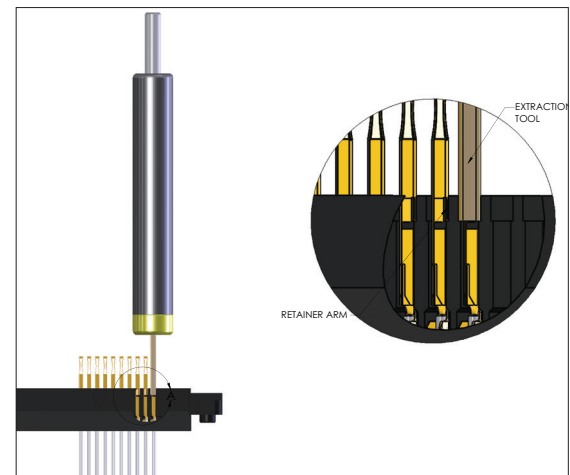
Figure C. Ensure that the tool is kept perpendicular to the module face to avoid damage to the contact and tool.
